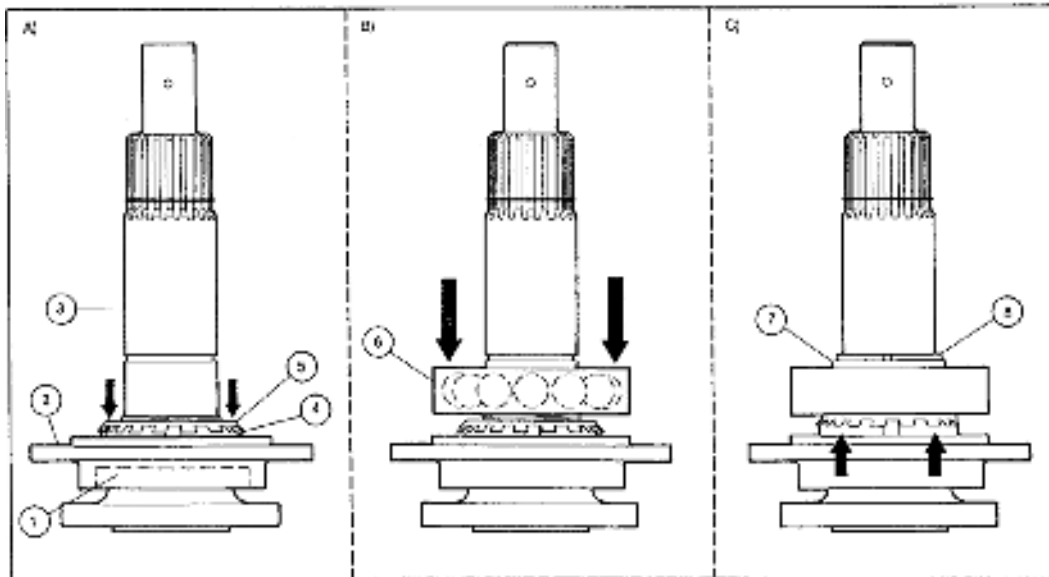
Assembly of Output Shaft Parts Prior to Installation in Housing.
